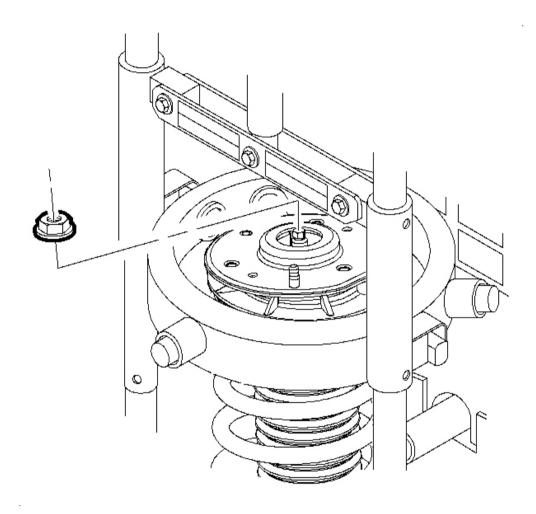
Strut Shaft & Nut Courtesy of GENERAL MOTORS CORP.
